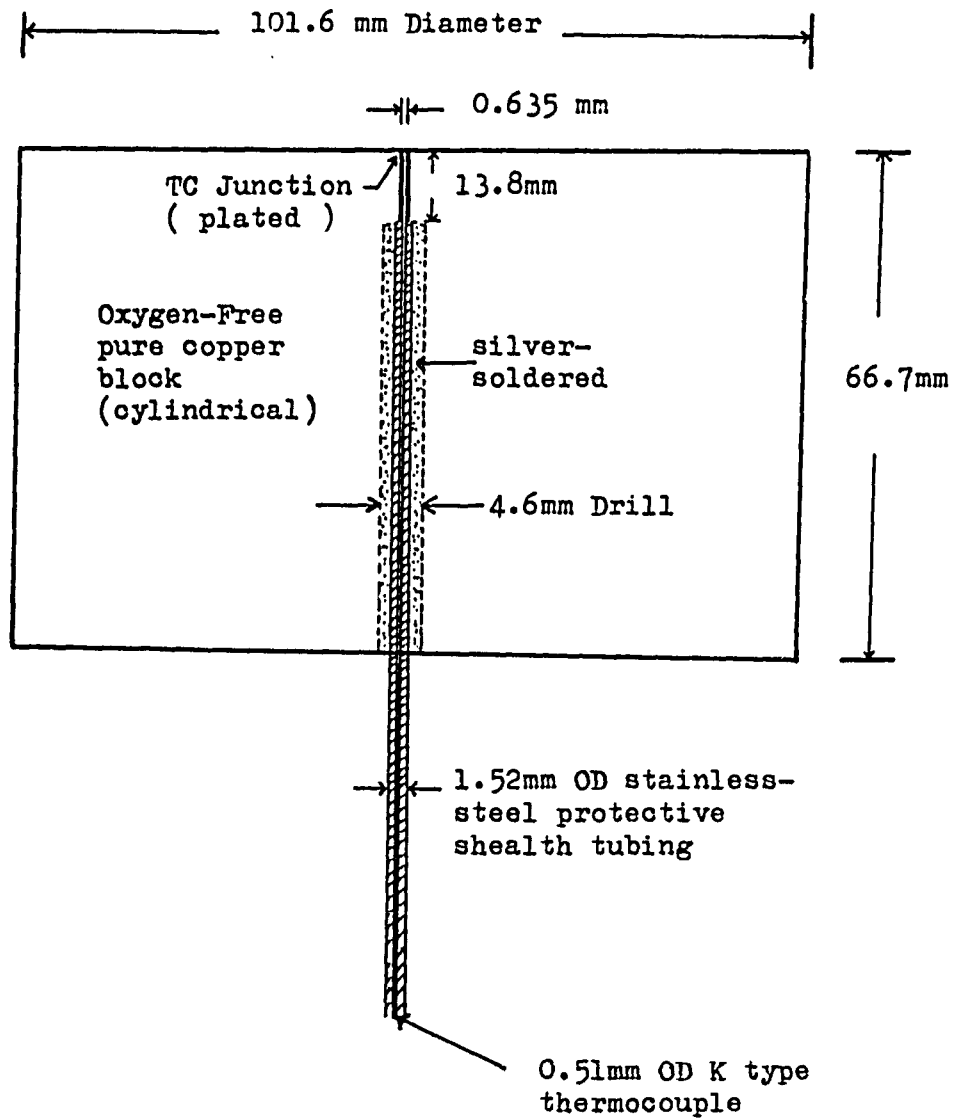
CROSS SECTION OF QUENCH TEST BLOCK
